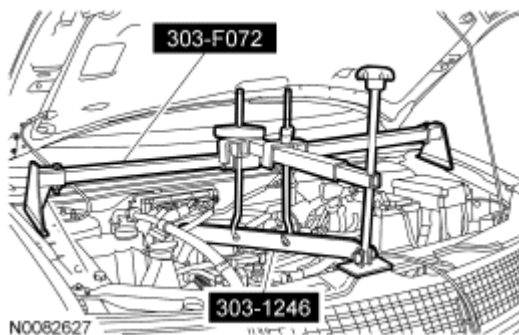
Installing Engine Support Bar & Spreader Bar To Support Engine
